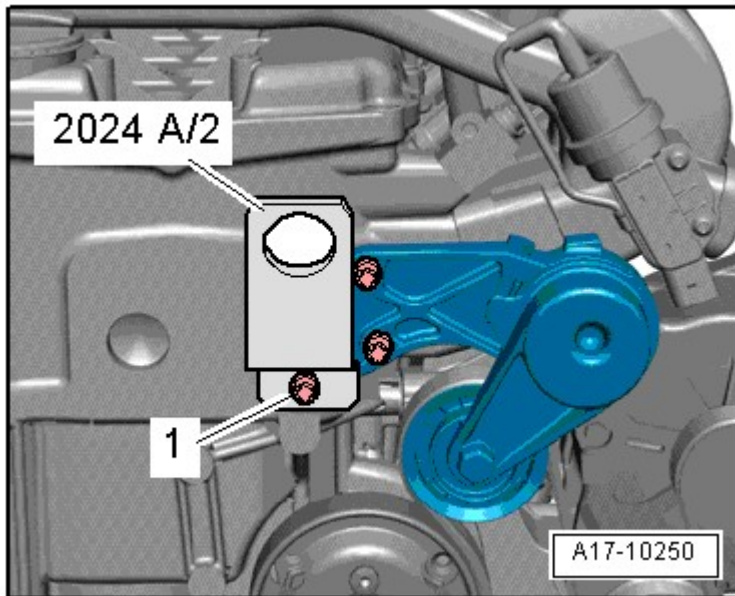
Attaching 2024 A /2 With An M8 X 35 Bolt -1-
